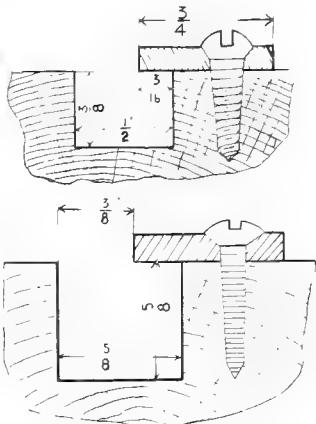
Standard Size Grooves for Ring Fixtures.
